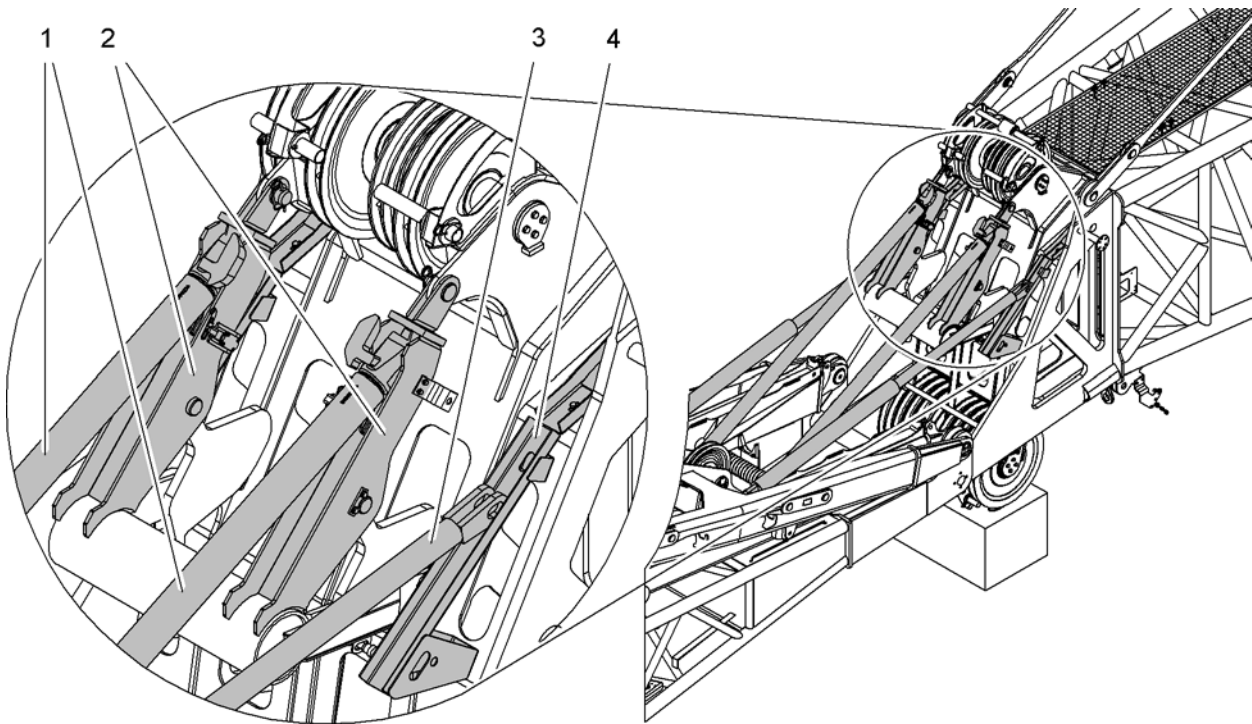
Rigid and hydraulic tilting-back supports should be located in the guide rails on the boom head section
